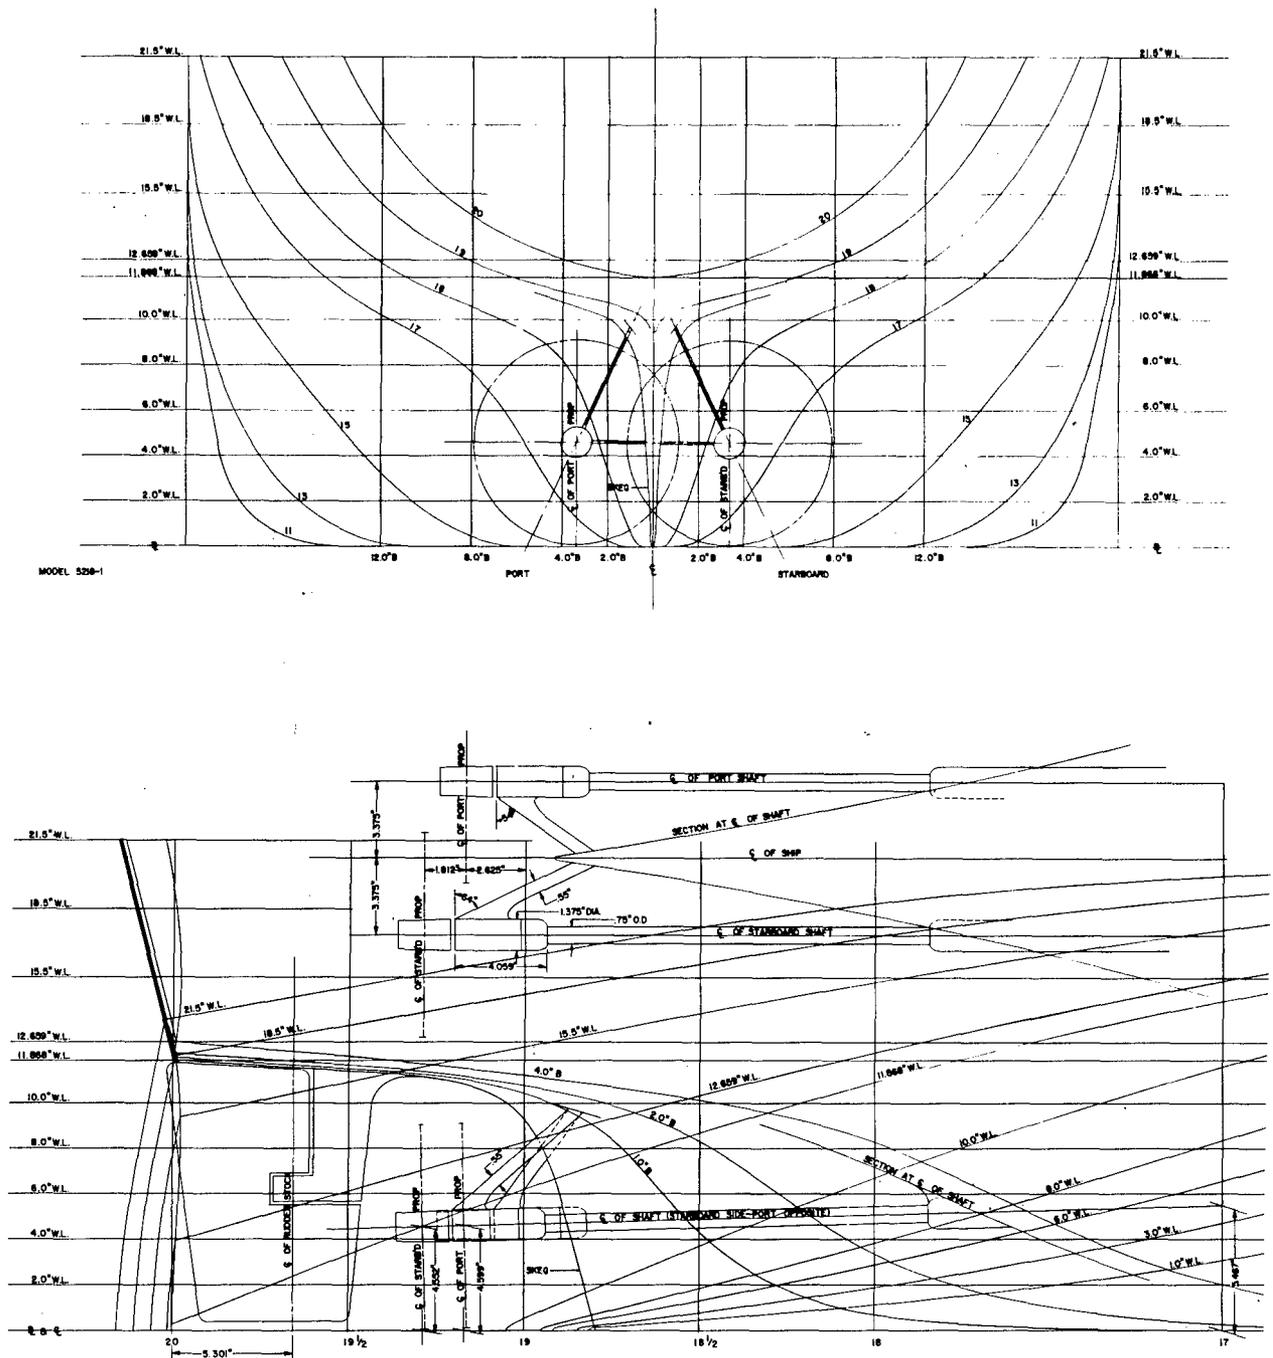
Afterbody Lines Drawing for Overlapping Propeller Design Model 5218-1, Showing Shafting, Struts, Rudder, and Propeller Arrangement
